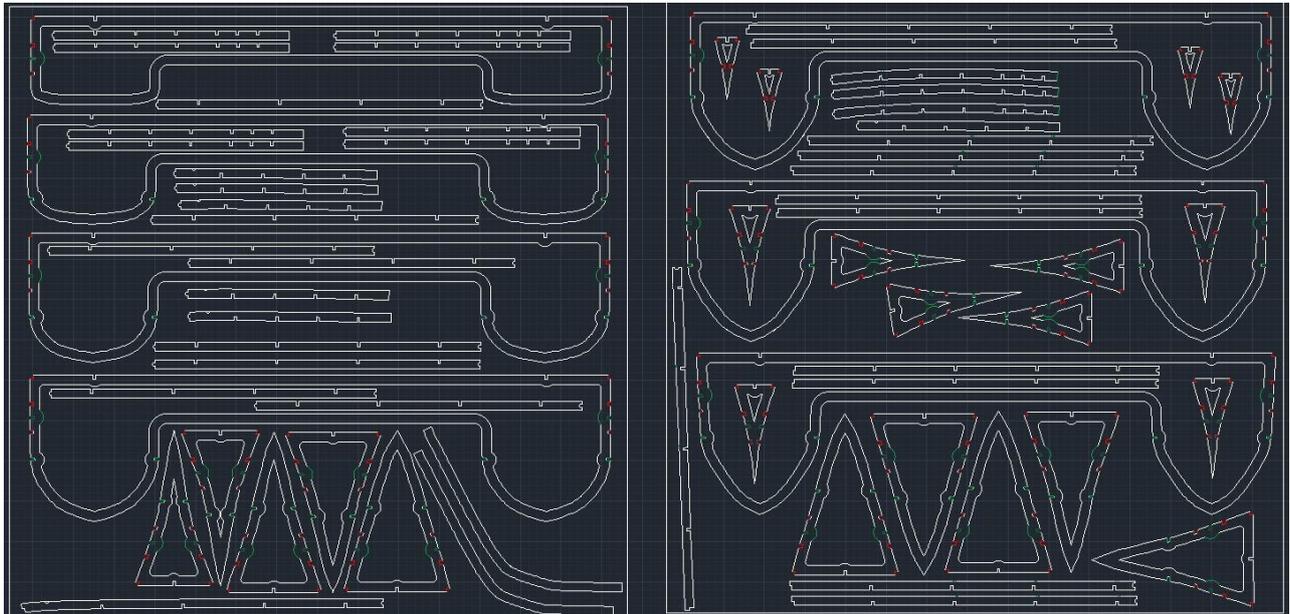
Ertuğrul Body Structure Laser Cutting Plan and Part Layout
